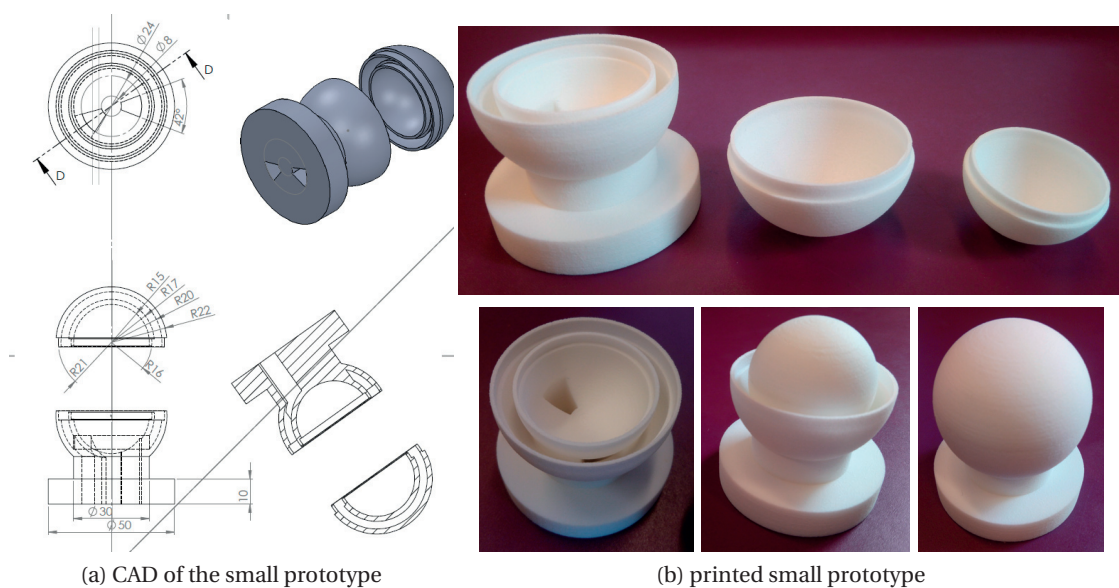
Small multilayered sphere prototype: (a) CAD details; (b) mounting pictures.
